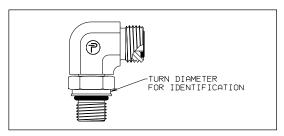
Metric Seal-Lok Elbow Stud Fitting
